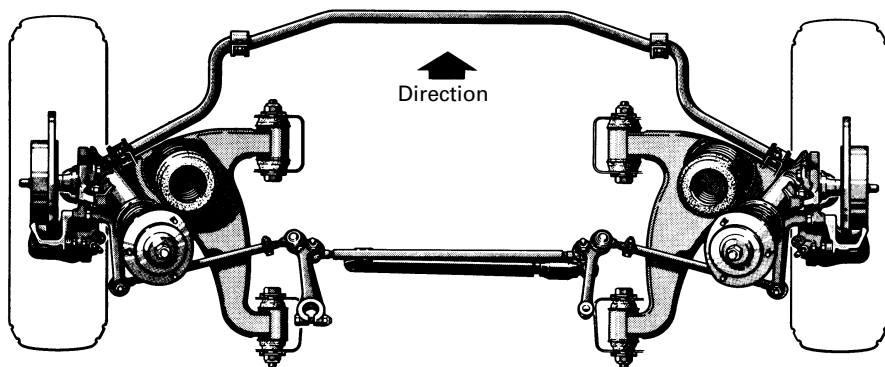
Top view of the strut damper front axle on a Mercedes vehicle. The intermediate rod and the tie rods are fixed side by side on the pitman and idler arms and one grips from the top and the other from the bottom into the two levers; the steering square is opposed. The steering damper is supported on the one side at the intermediate rod and on the other side on the suspension subframe.
